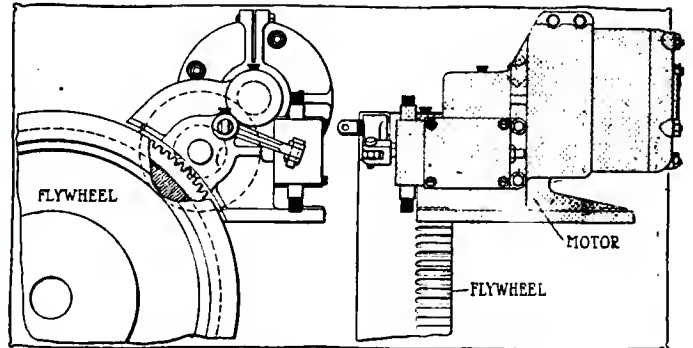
Mounting of the Elyria-Dean cranking motor on flywheel of engine
